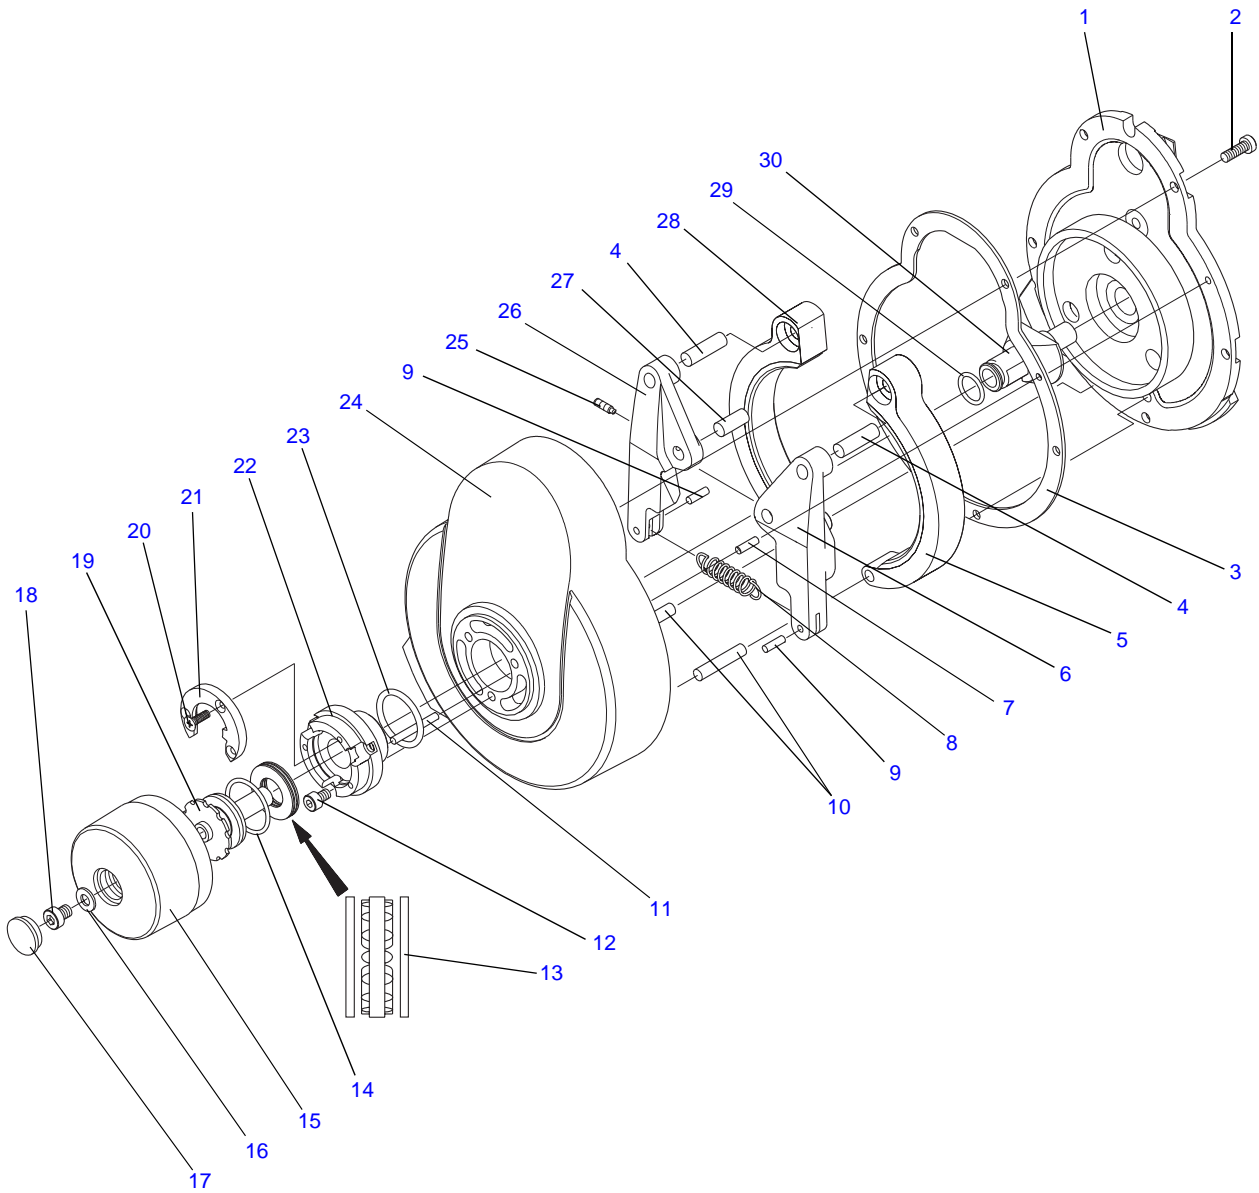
Vector 70/70H Pan and Tilt Head - Tilt Drag Mechanism
